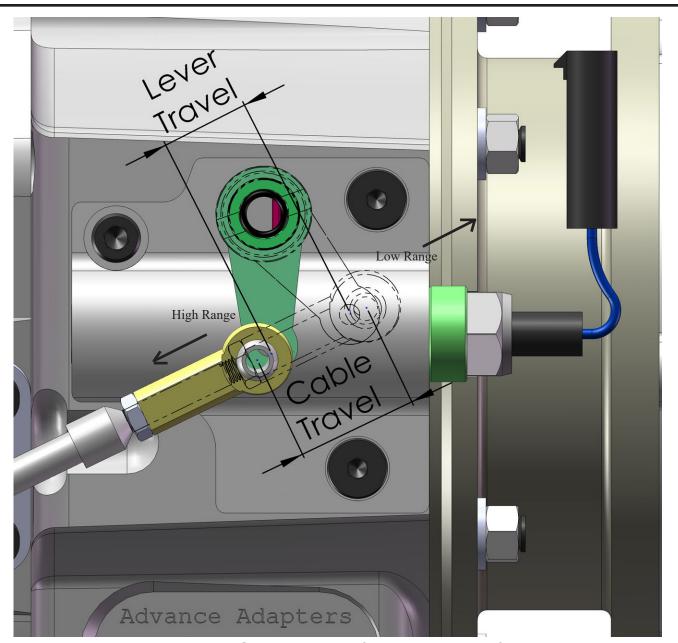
RubiCrawler cable shifter adjustment verification. See Step 2 of the RubiCrawler Shifter Cable Gear Box End Adjustment
